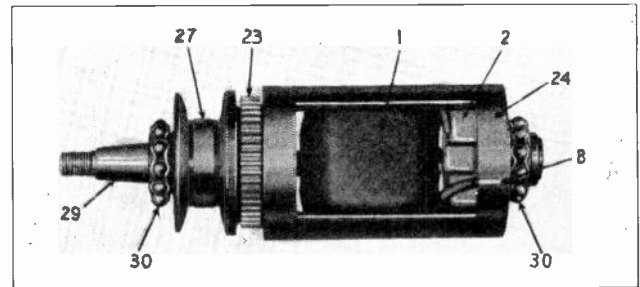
A. Magneto armature removed from housing to show bearings, slip ring, armature core, windings, and condenser.
